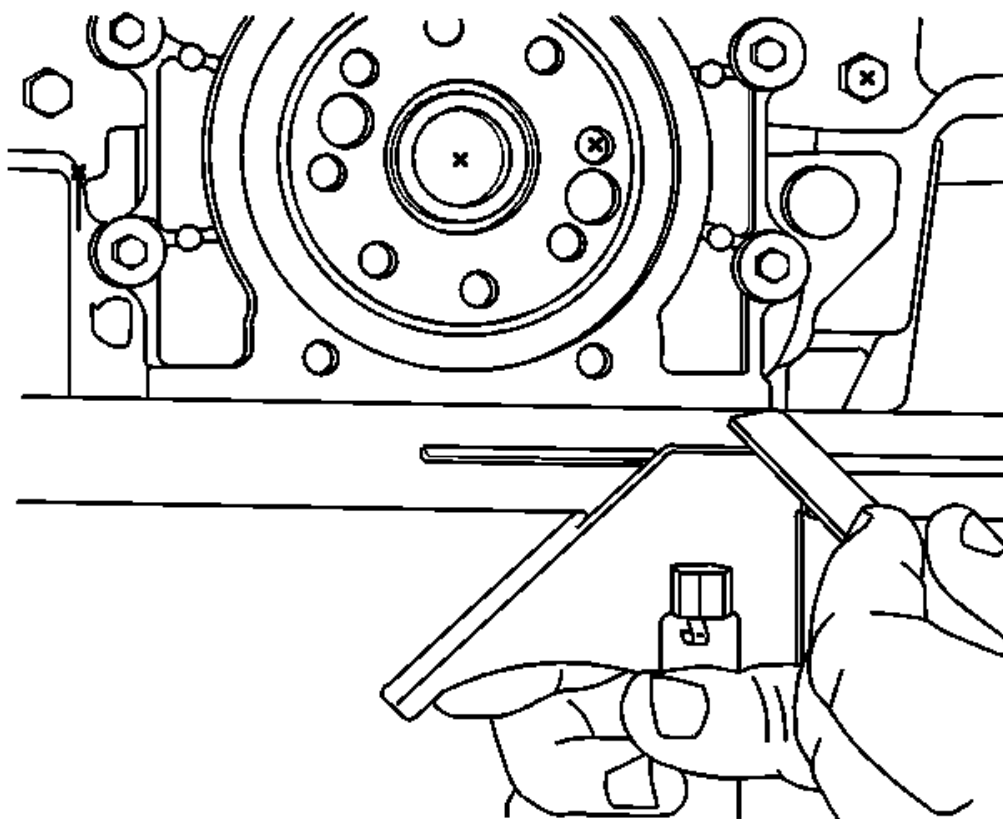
Measuring Pan Flange & Crankshaft Rear Oil Seal Housing Flange
